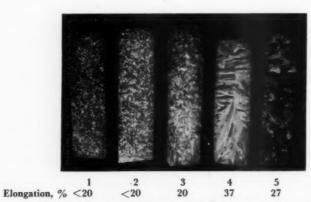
Macro-etched Sections of Chilled Block Castings.
